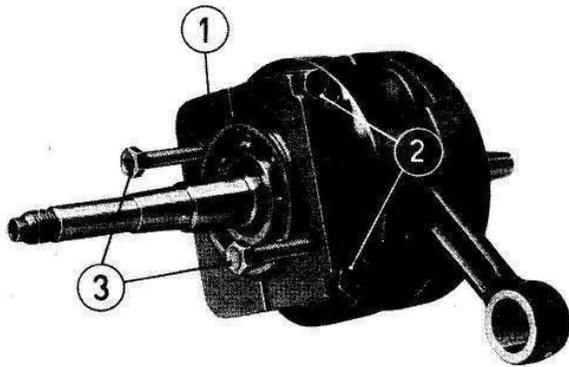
Pulling the 6306 ball bearings from the crankshaft
